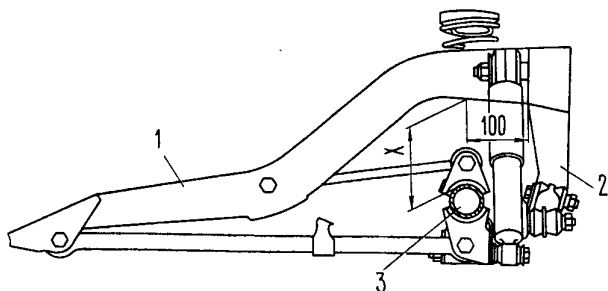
Rear Suspension Installation Diagram: 1 - body sidemember; 2 - transverse radius rod bracket; 3 - rear axle beam; X = 152 mm
